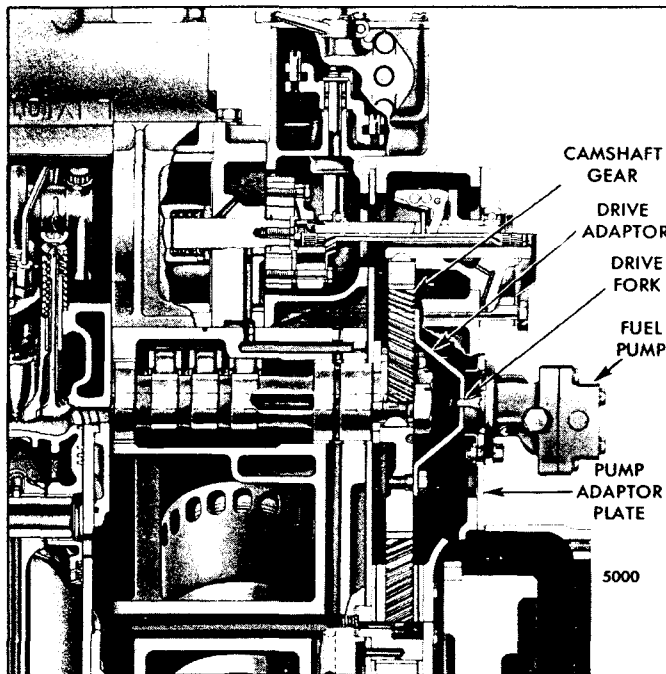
Camshaft Drive for Fuel Pump (6V Engine Shown)
